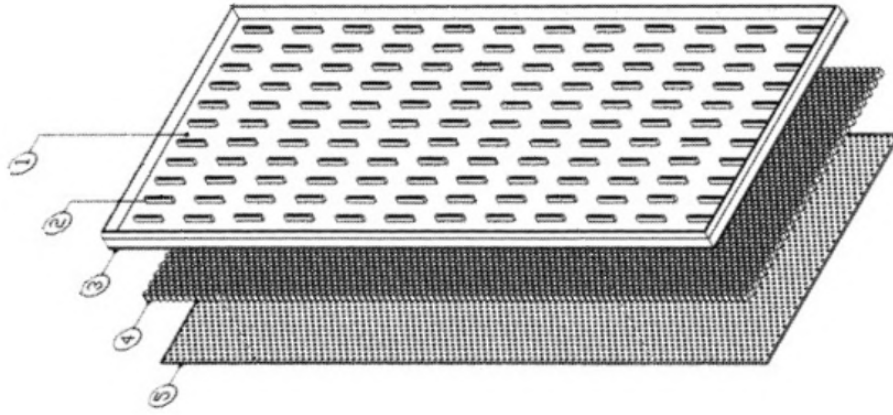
Schematics of a single PMD module: (1) Top PCB, (2) 32-pin connectors, (3) edge frame, (4) honeycomb of  $48 \times 96$  cells, (5) bottom PCB
